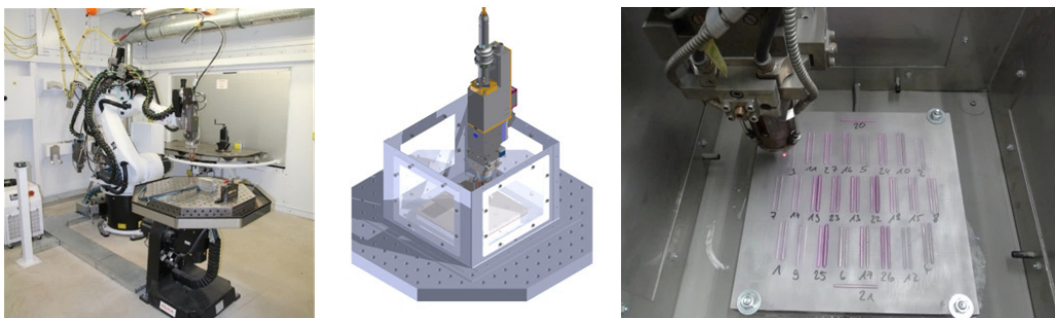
(a) robot cell (TruLaserRobot); (b) shielding cabin for argon atmosphere; (c) processing head applying single bead welds on base plate in the shielding cabin.
